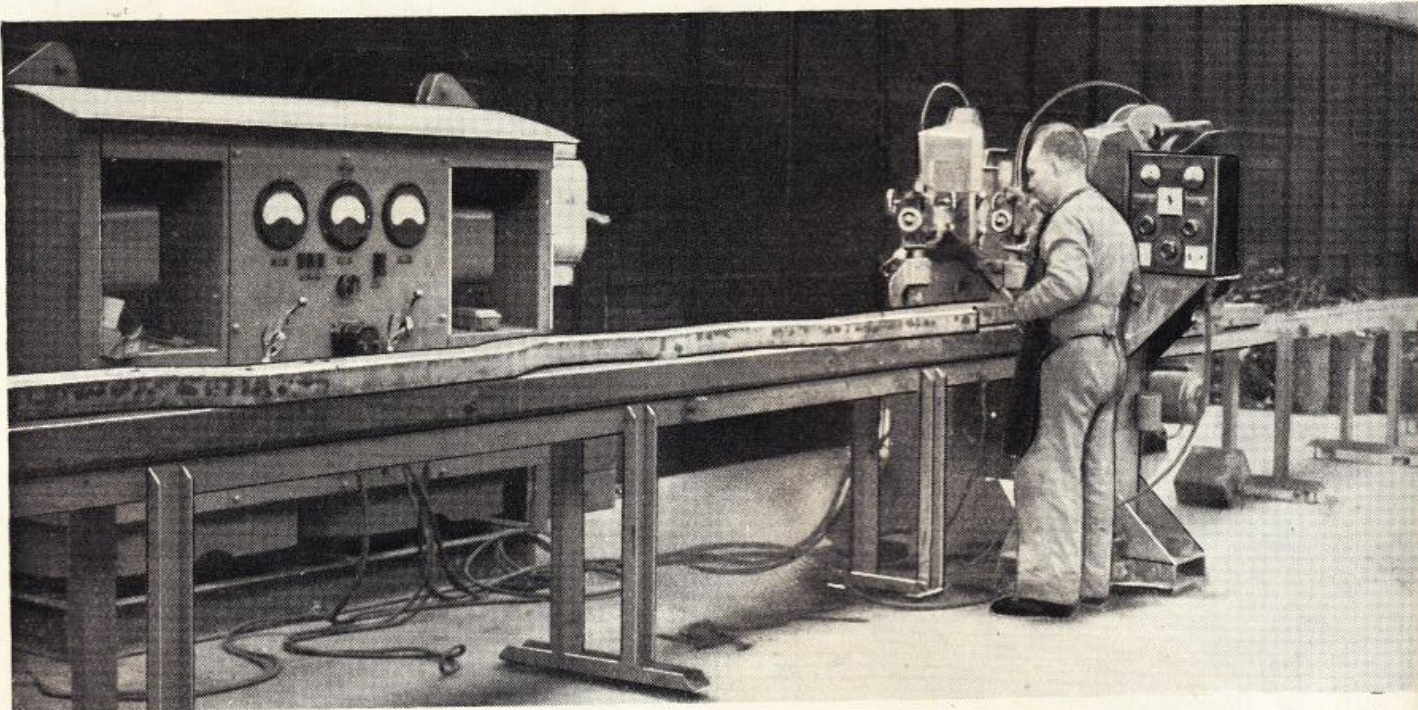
Automatic Seam Welding Machine for Main Chassis Frame Members. Two Seams are dealt with Simultaneously, and two Main Frame Members are accommodated on the Table of the Machine, these being Placed End to End
